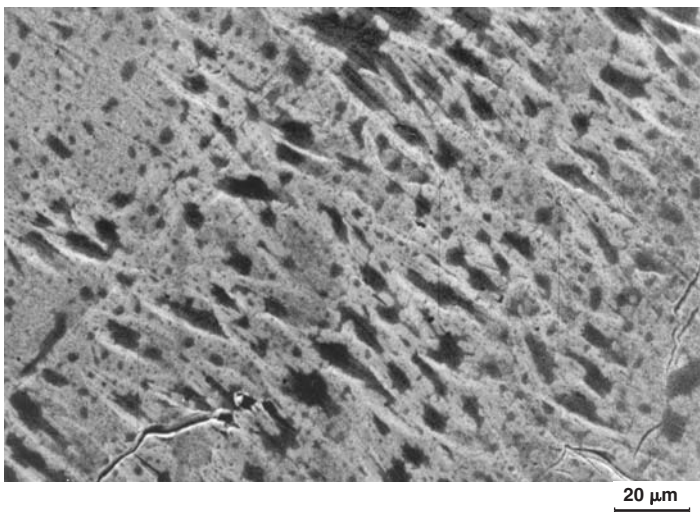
Fretting damage on the barrel surface of the failed piston. SEM photograph
